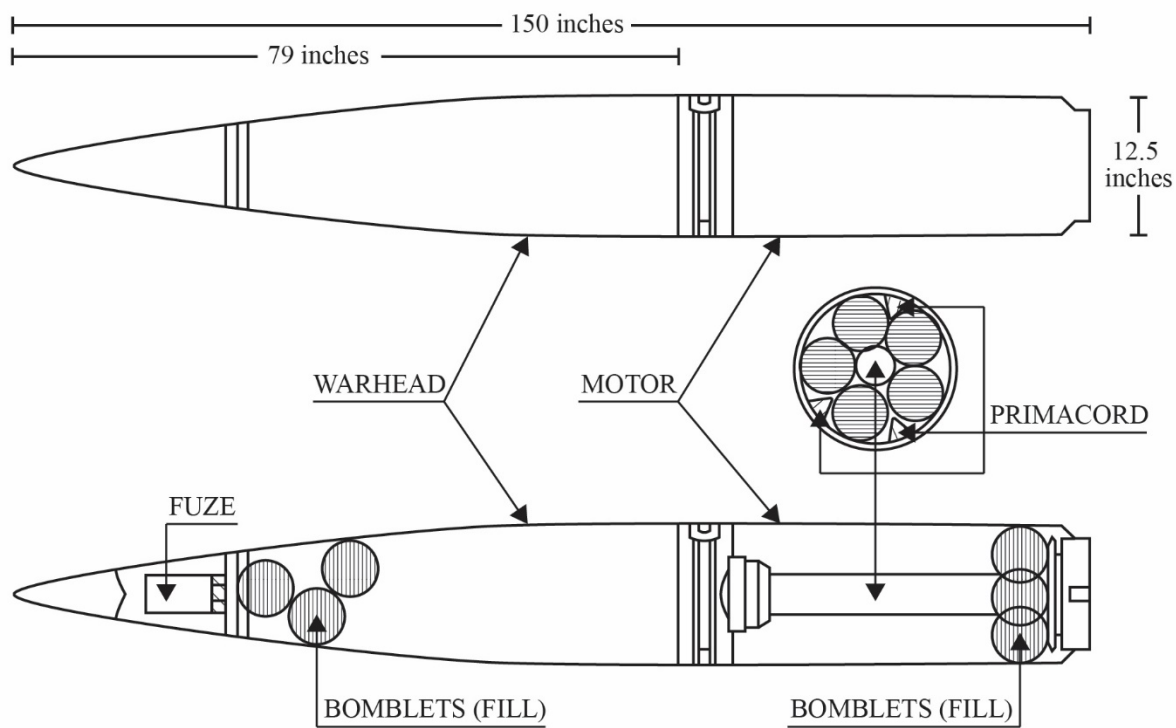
Rocket, 318-mm, Warhead, E20, Little John - Line Drawing
